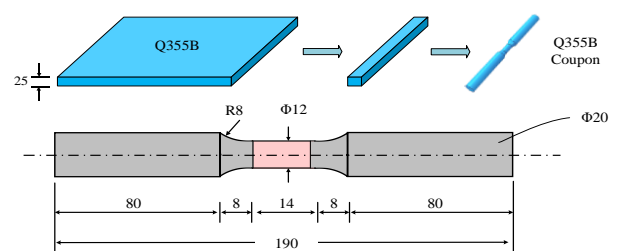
Dimensional diagram of Q355B specimen (unit:mm)
